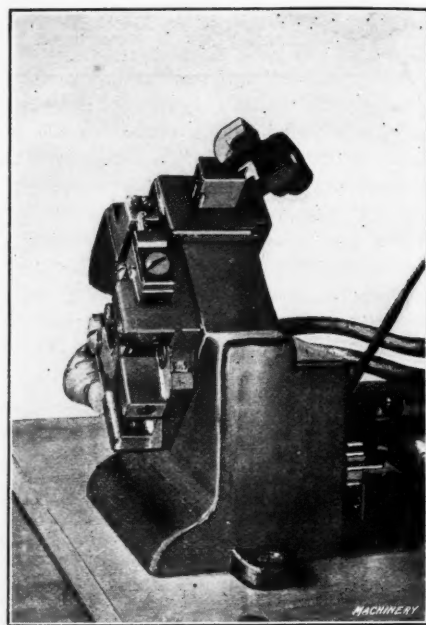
Closer View of Work-holding Jaws shown in Fig. 3
